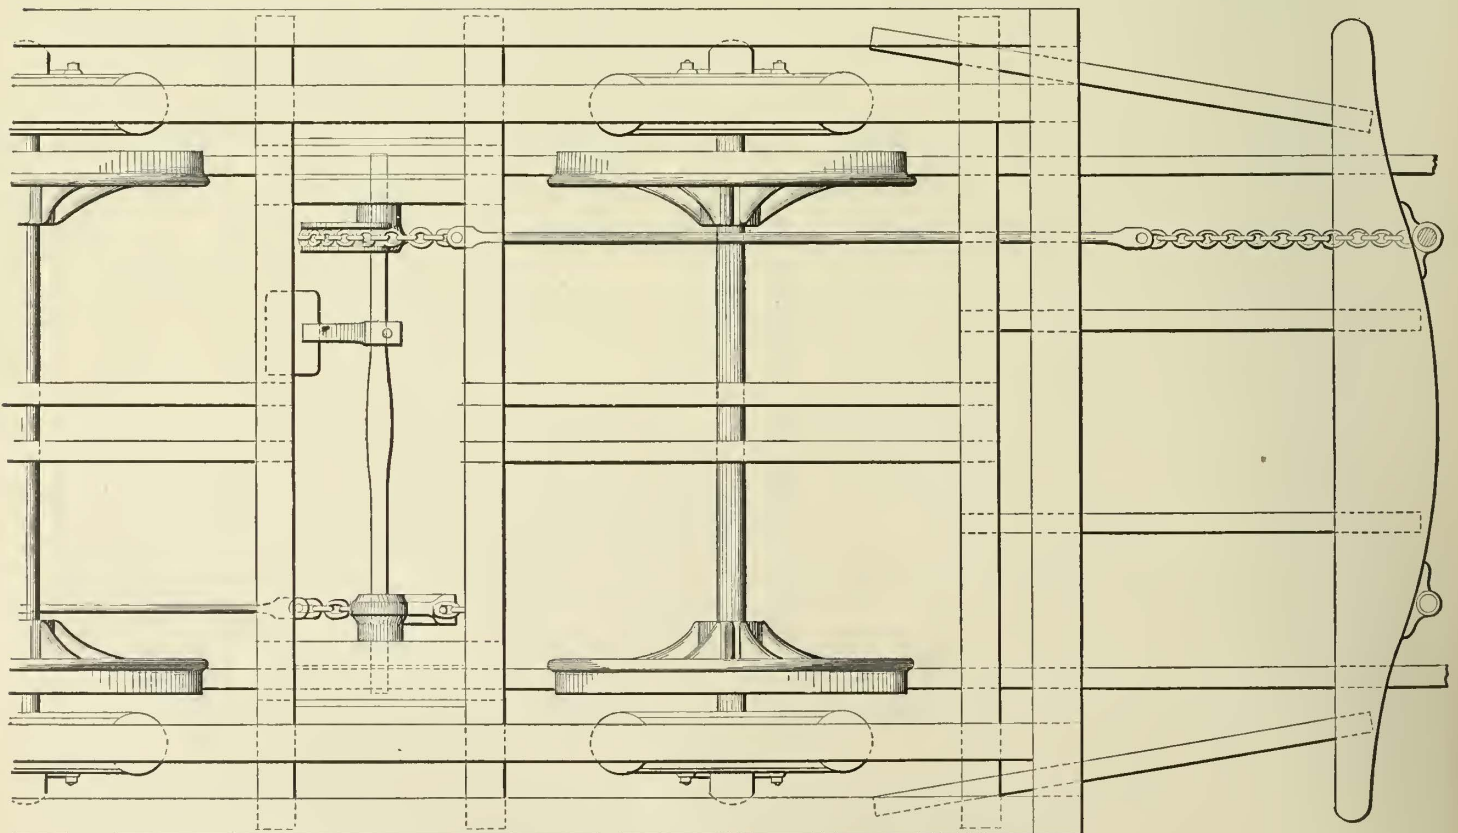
WOOD & FOWLER TRACK BRAKE FOR CABLE CARS—PLAN.
